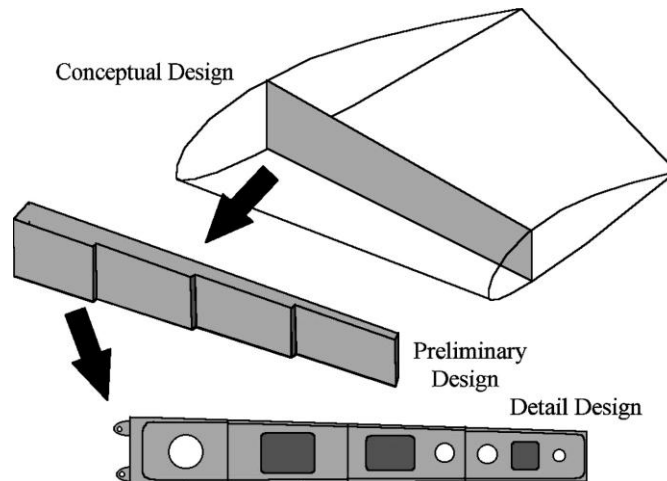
Wing Spar as Defined in Conceptual, Preliminary, and Detail Design
